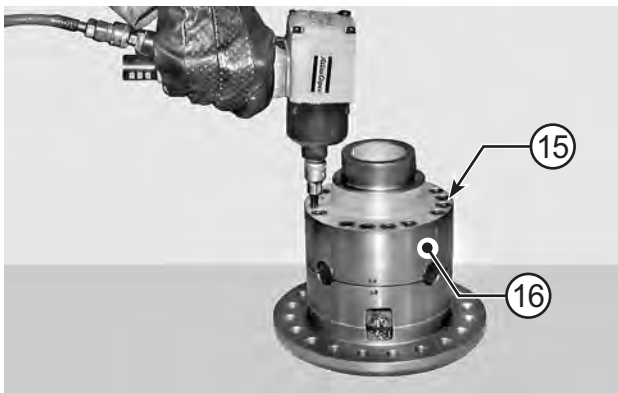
Loosen and remove check screws (15) from differential box (16).
